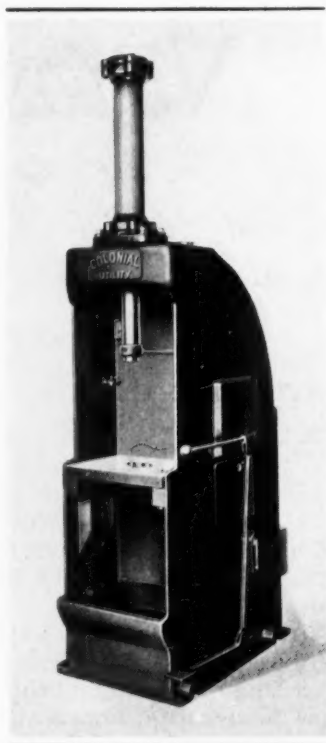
Vertical Broaching Machine Built in 6- to 15-ton Capacities
